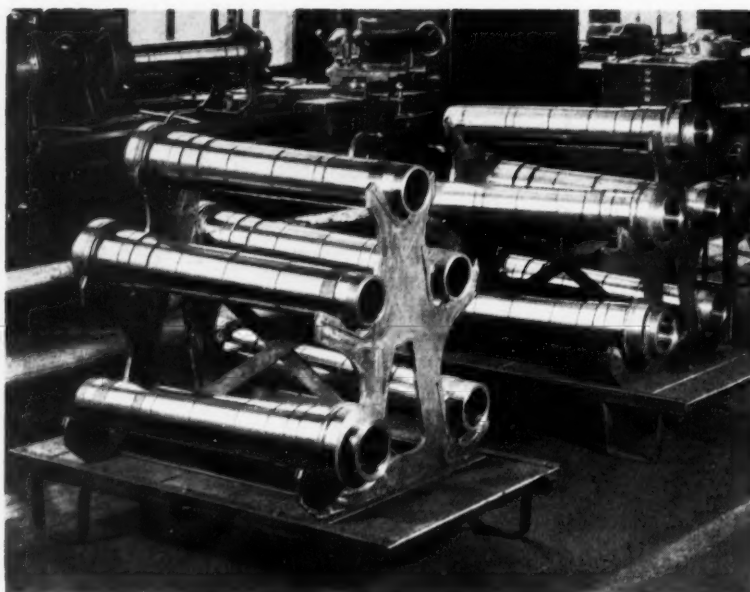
Spindle Trucks or Carriers Prevent Damage to the Finished Surfaces. Note the Copper Pads Riveted to the Bracket Arms
